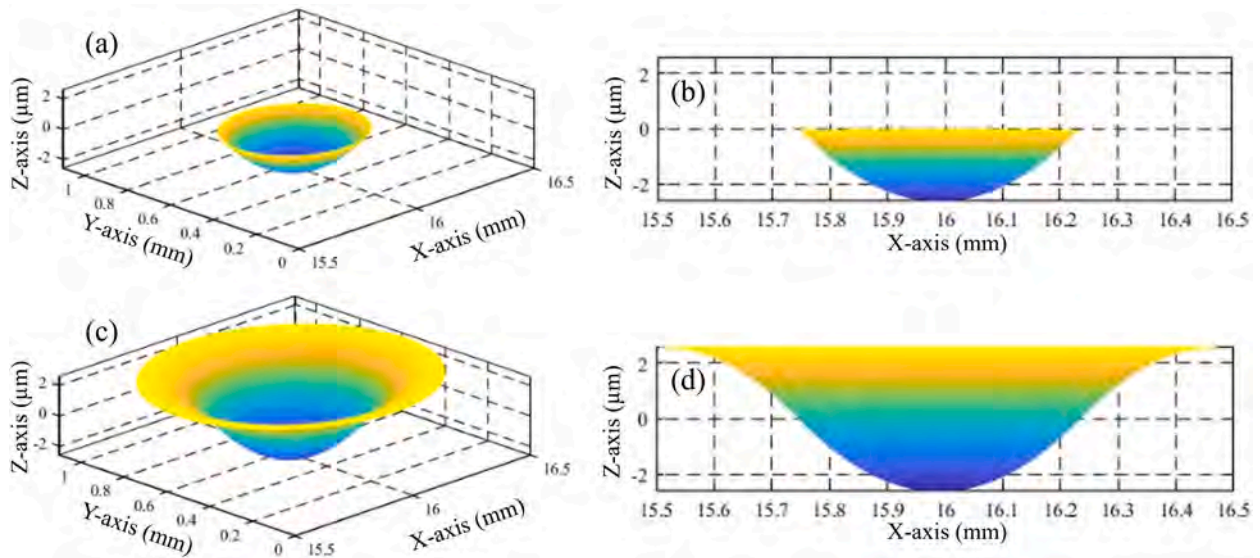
(a) Overview and (b) side view of simple spherical dimple and (c) overview and (d) side view of the torus-shaped spherical dimple for tool acceleration aiding.
